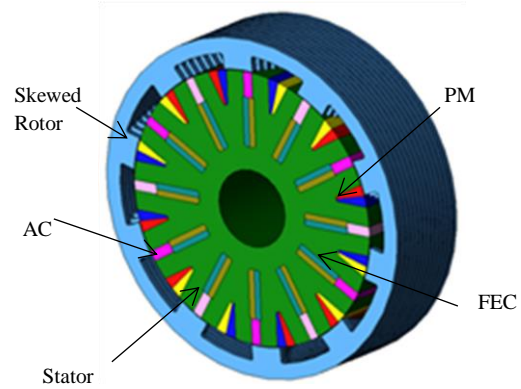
3D cross-sectional view of OR-HEFSM with rotor skewing structure
